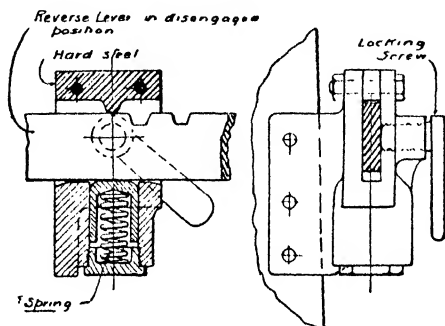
Locking Gear for Push-and-pull Reversing Handle.
